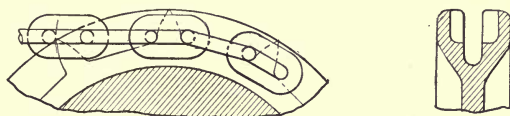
Sprocket Wheel Designed for Common Link Chain.
